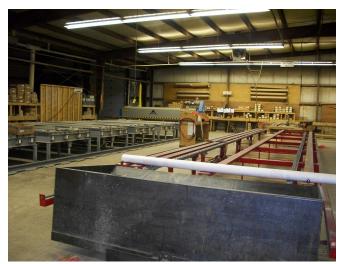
Wall Assembly and Truss Table *Source: Forest Homes
